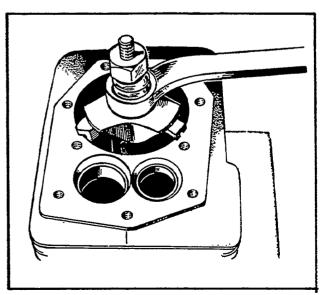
REMOVING RIDGE FROM THE CYLINDER
